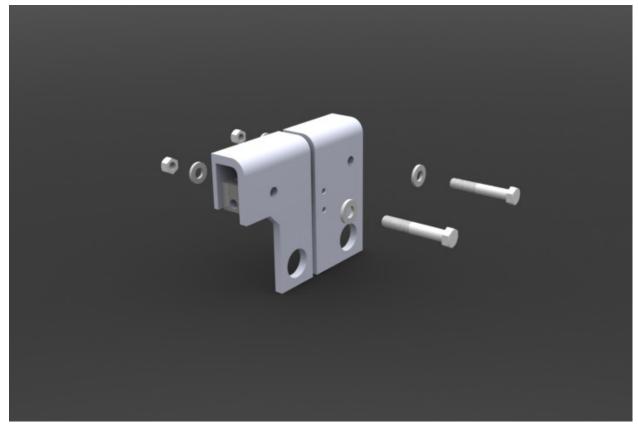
Clamping the J-Bracket Assembly to the Axle Housing
